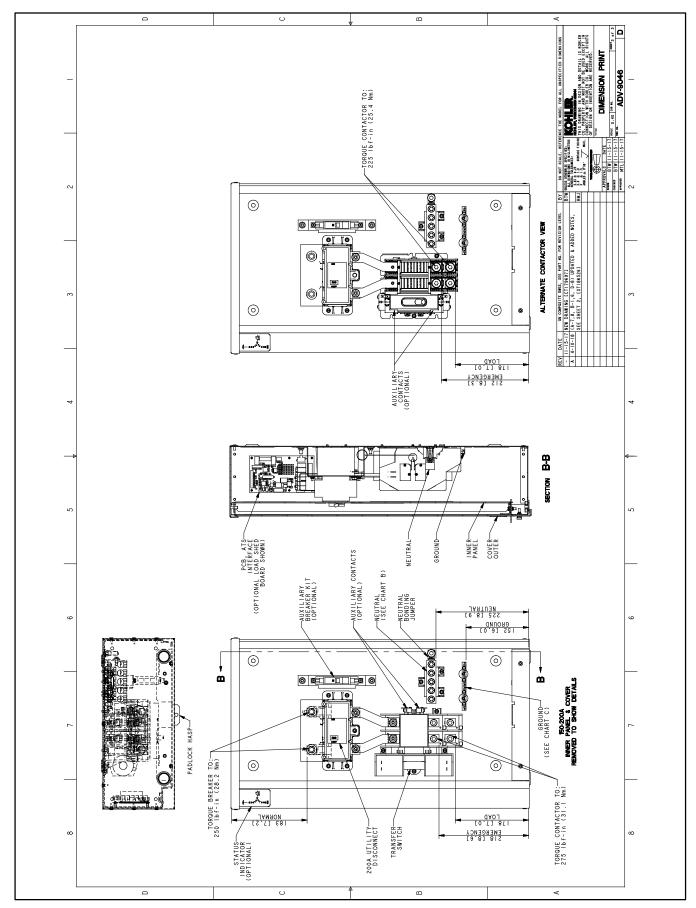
Enclosure Dimensions, 100-200 Amp Single-Phase, Service Entrance, ADV-9046, Sheet 3 of 3
